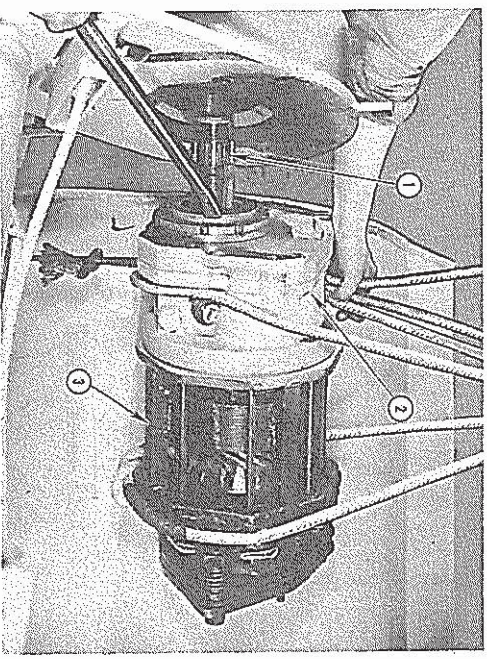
REMOVING MOTOR AND GEAR BOX
